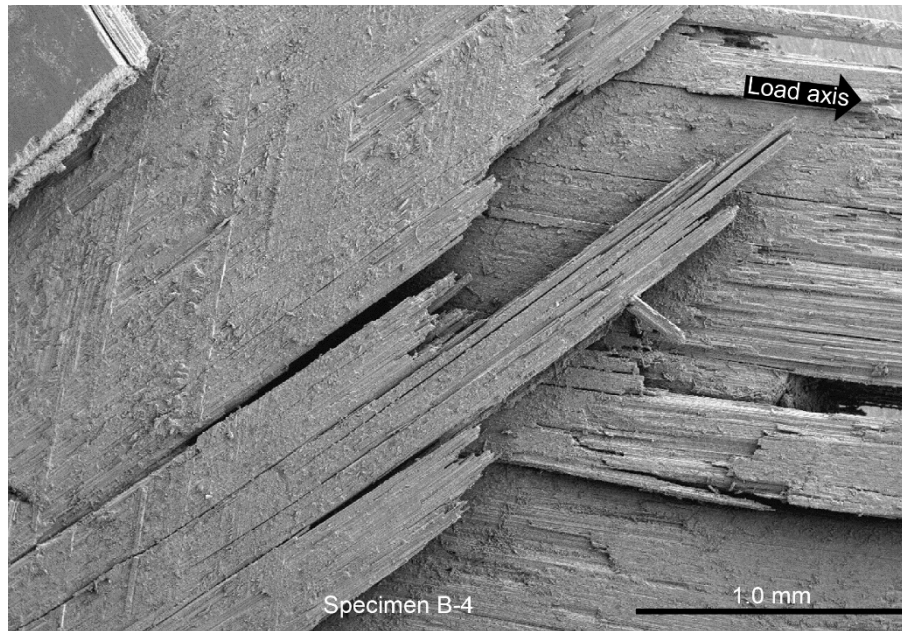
SEM image of surface crack fracture of specimen B-4.
